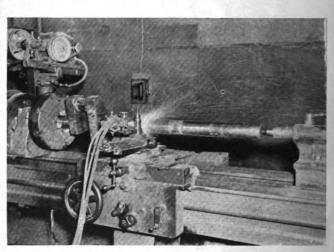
Coating the crank pins and journals of a compressor shaft with carbon steel. The hard surface thus applied will give a maximum of
